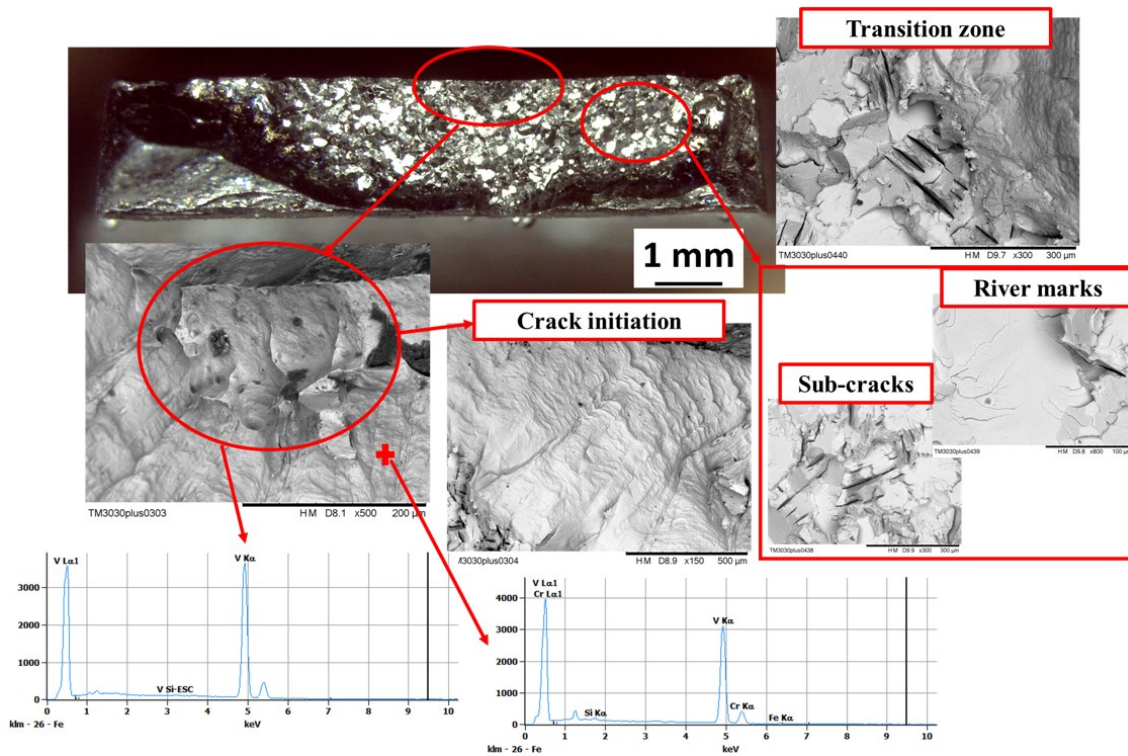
Fracture surface of the specimen tested at  $\Delta\sigma = 220$  MPa and failed at 67,000 cycles (specimen 8): (a) Fractographies and (b) EDS [97].
